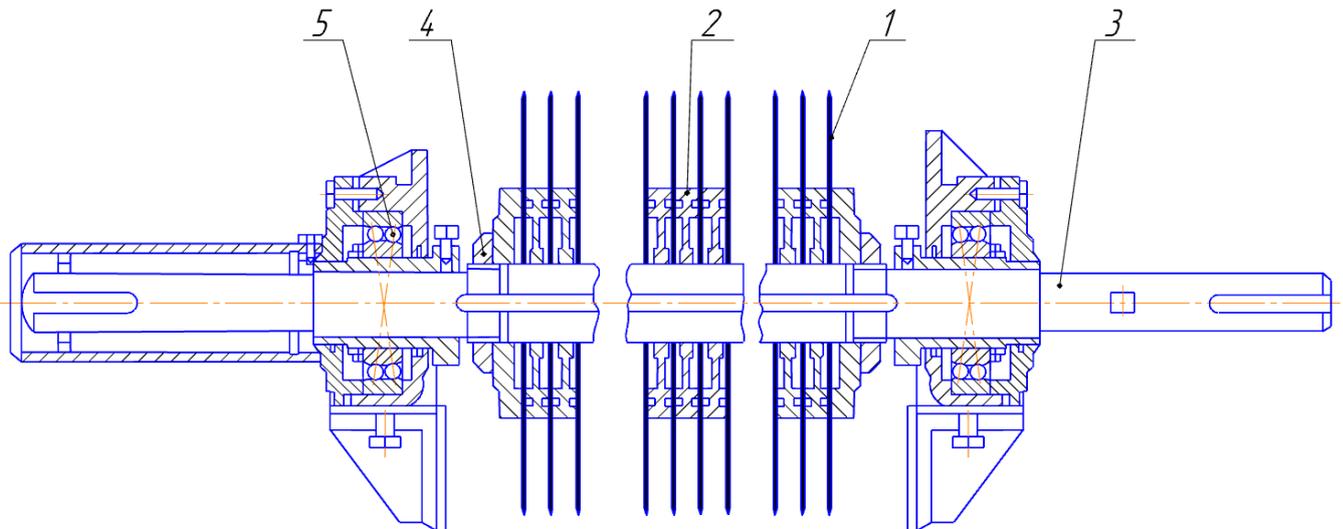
Design of the assembly of the saw cylinder of the fiber separating machine.
